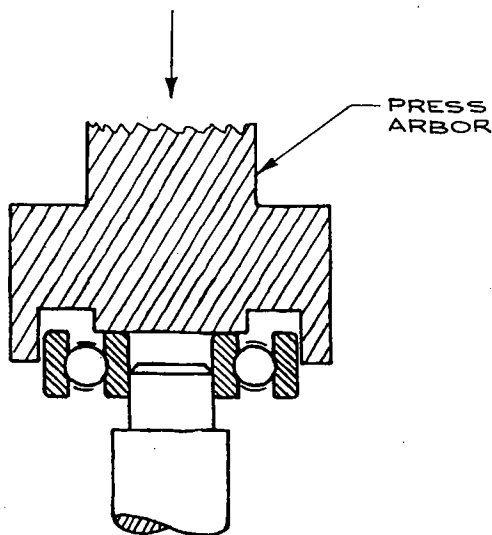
Installation of a bearing. The press arbor should bear on the race that is being fitted.
